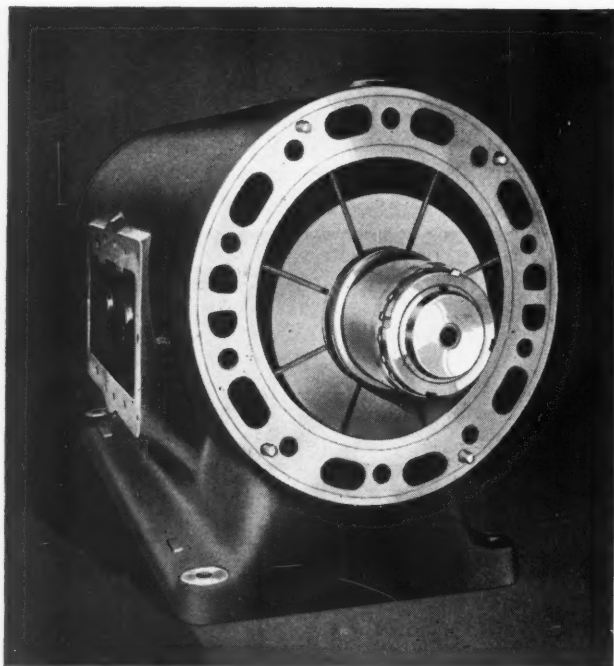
Open-end view of rotary, multi-vane type compressor. Eccentric mounting of the rotor within the cylinder forms a crescent-shaped space that is divided into compartments by the blades. Eight equally spaced slots are milled to hold the blades, as shown in the heading illustration
